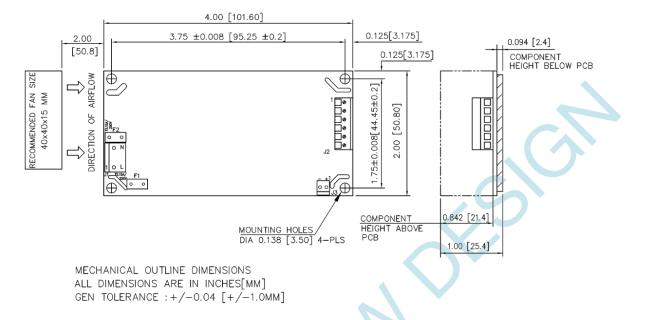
Mechanical Drawing – Screw Terminal (Option 1)
